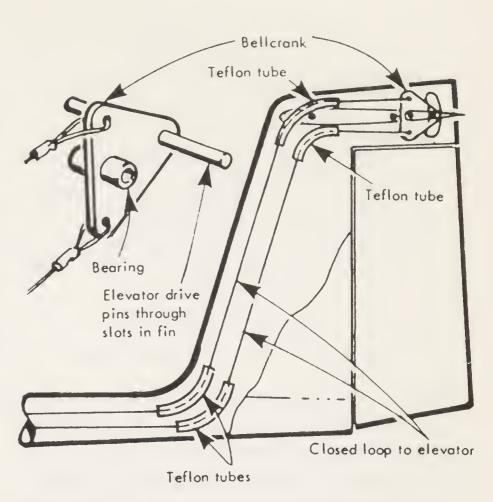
Closed loop systems need not be only for long straight runs, as this T-tail arrangement shows.
